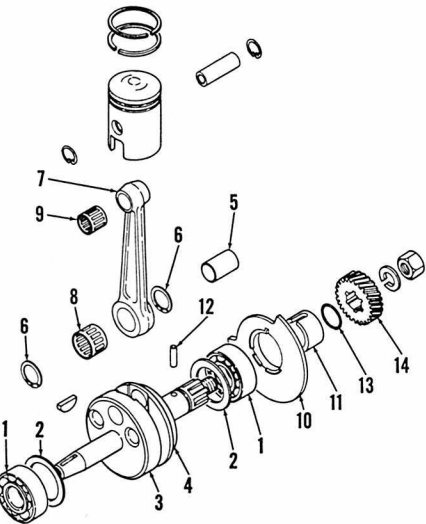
Exploded view of the crankshaft used on 100cc models. Other models are similar.
